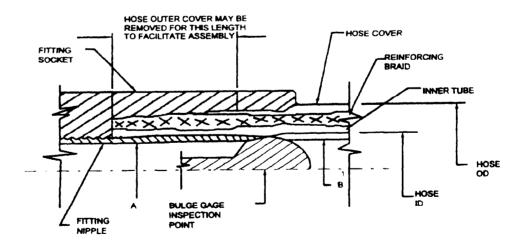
Minimum bulge of hose inner tube when fittings are assembled with hose conforming to MIL-H-8788.
